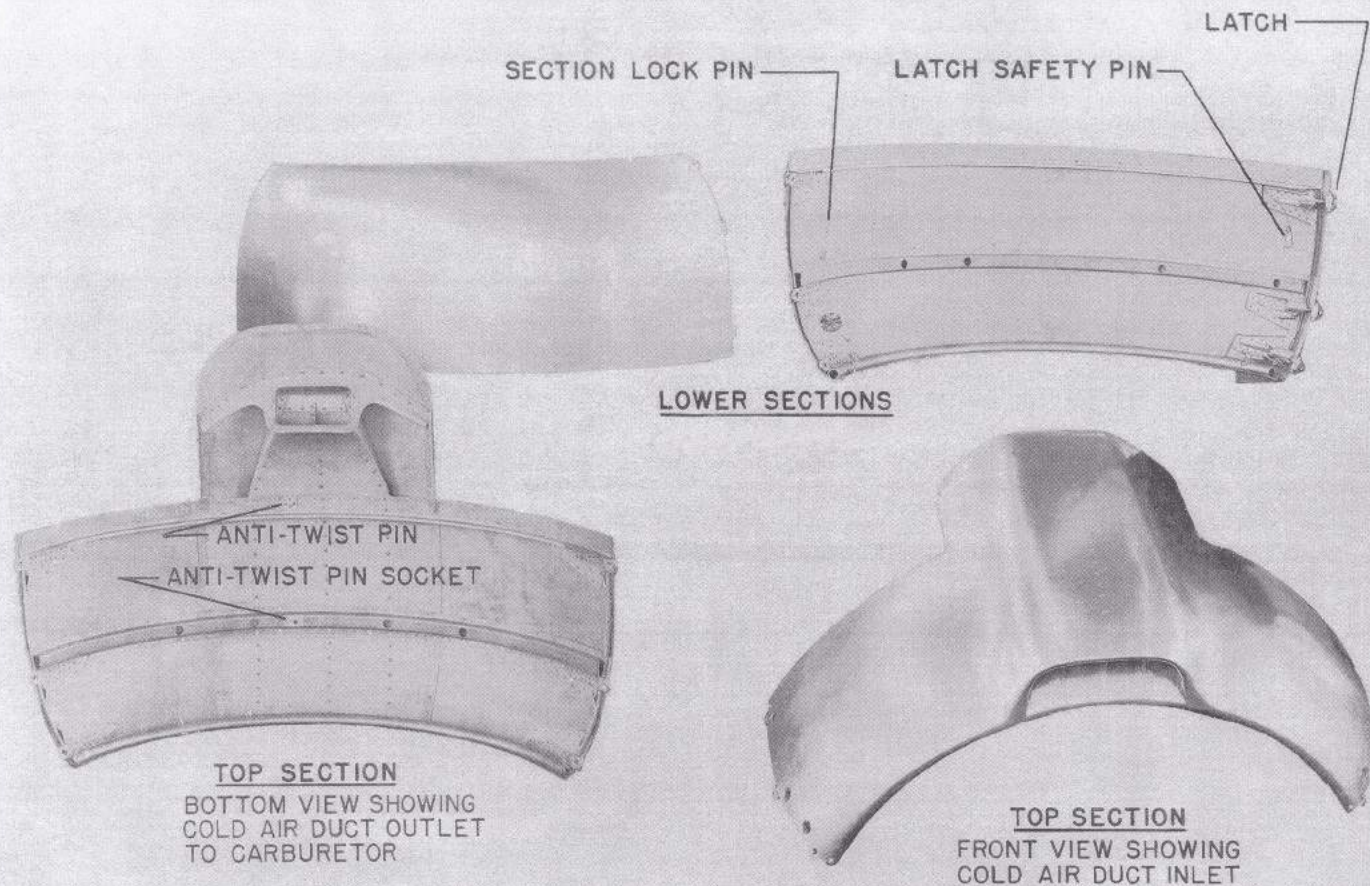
ENGINE HOOD COWL COMPONENTS
